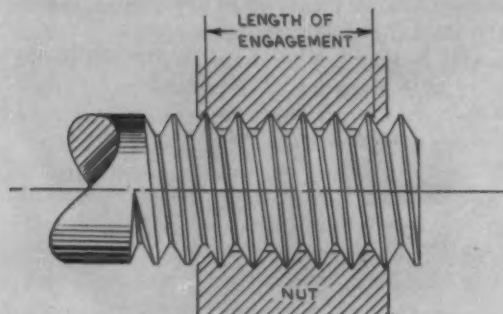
Where necessary (as in the case of translating threads) the length of engagement should be indicated on drawings. The term refers to the actual maximum amount of thread contact possible and not to the length of the thread.
